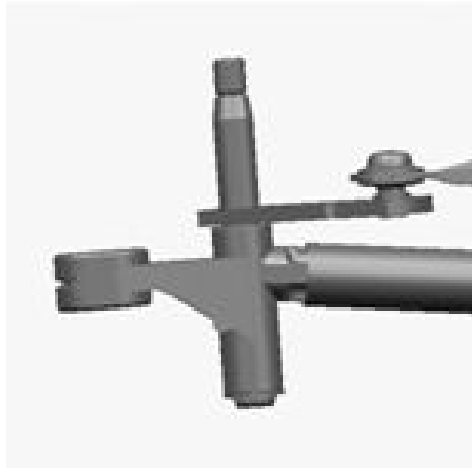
FRAME AND PIVOT HOUSING ASSEMBLY
